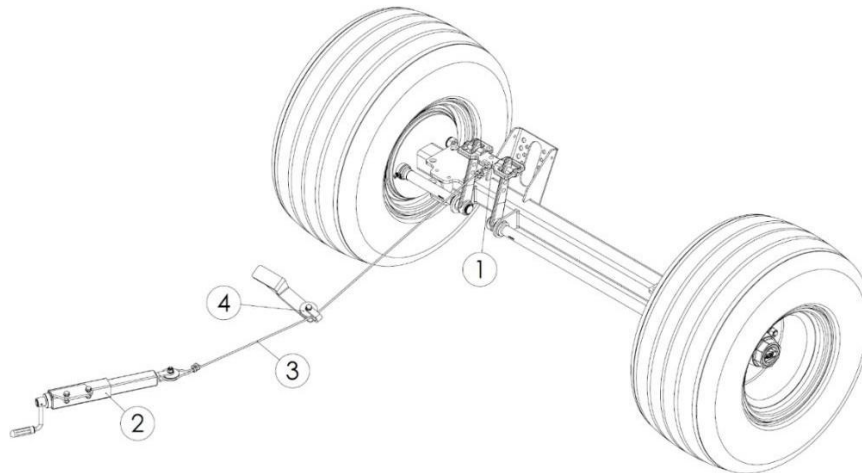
Parking brake design of the T659/2, T659/4, T659/5 models: 1 - axle spreader fixture, 2 - brake tensing element, 3 - cable, 4 - cable guide wheel
